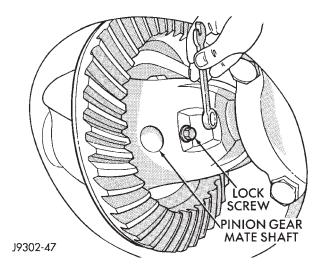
Pinion Gear Mate Shaft Lock Screw
